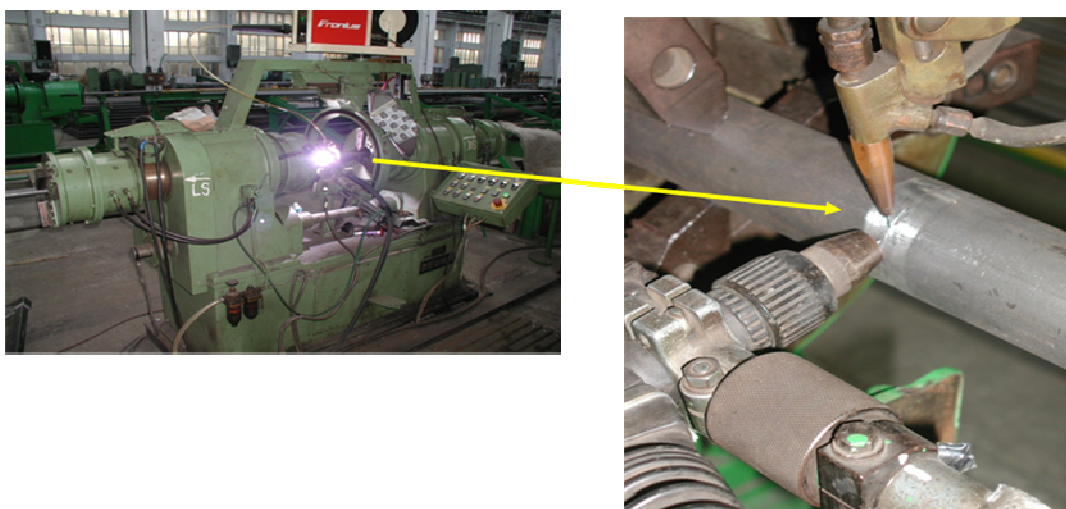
Application of pipes butt welding by automatic TIG process
